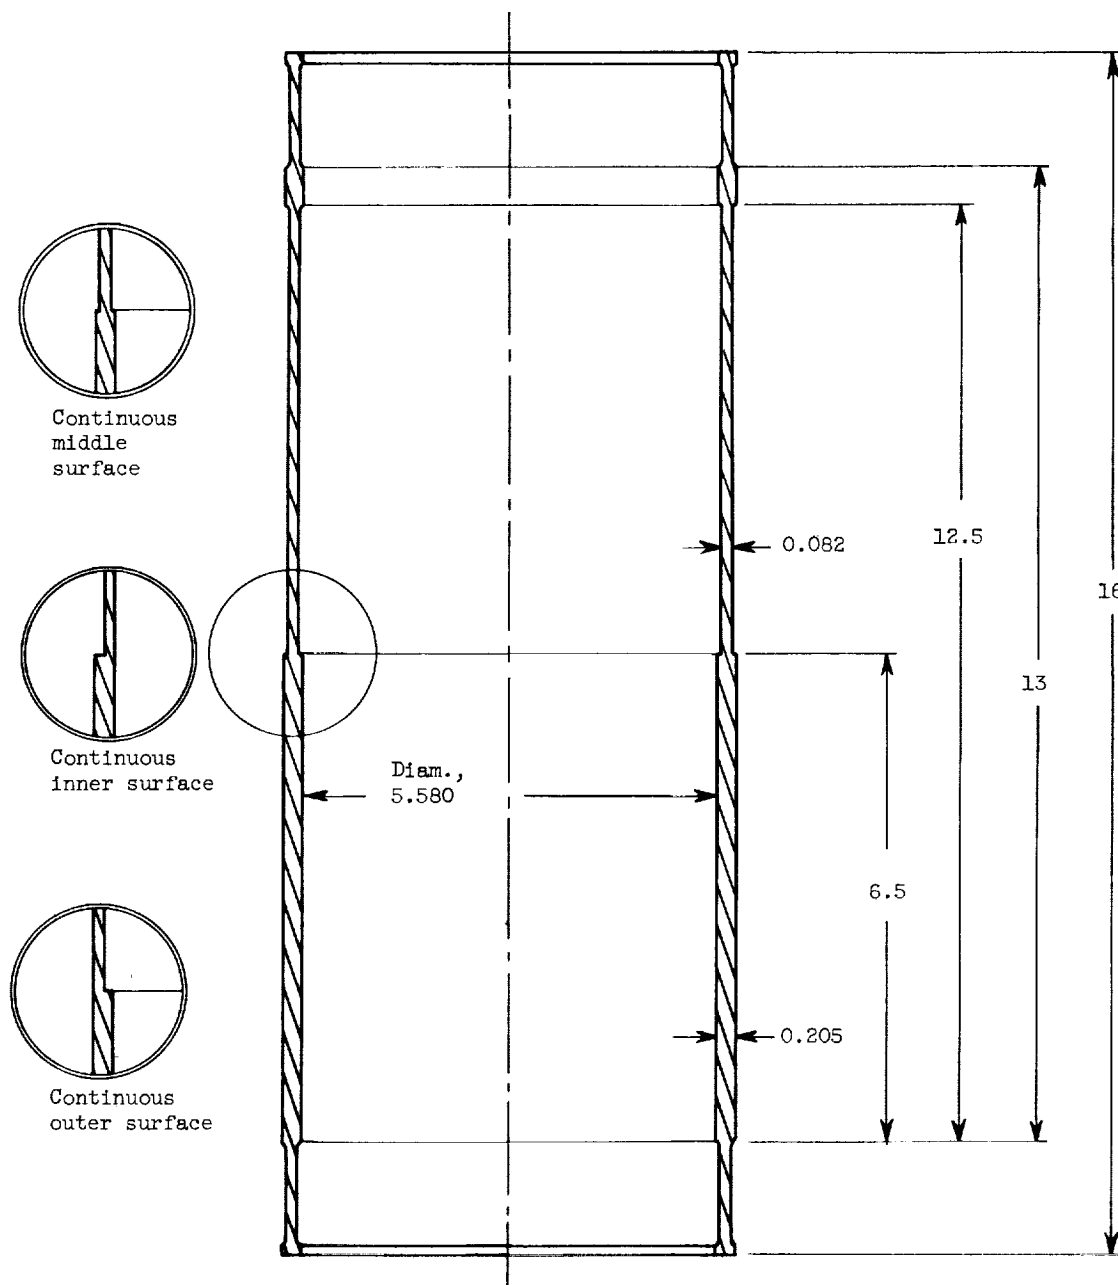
Geometry of three small cylinders. (Dimensions in inches.)
